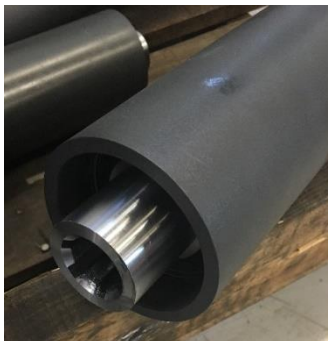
Picture showing the Drive Coupling protruding from the Linear Actuator Module
